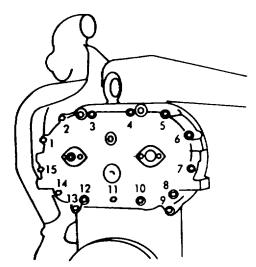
Balance Weight Cover, Bolt Tightening Sequence.
